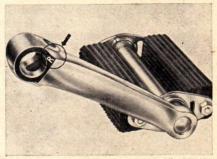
Identification marking on the pedal cranks. (May occur on the other end of the crank)
